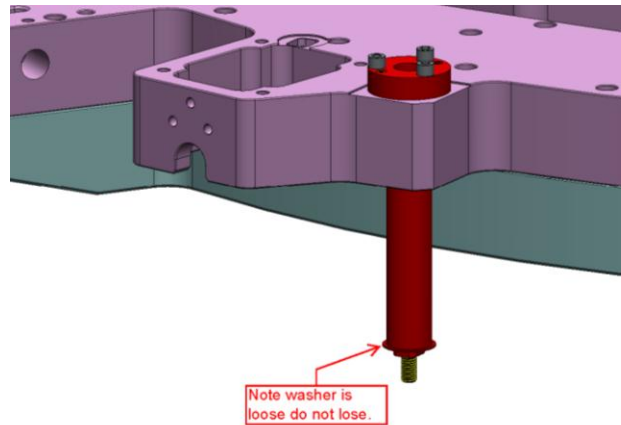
D1001110 Stage 0-2 Alignment Pin mounted onto D0901517 Cut-Out Optical Table
